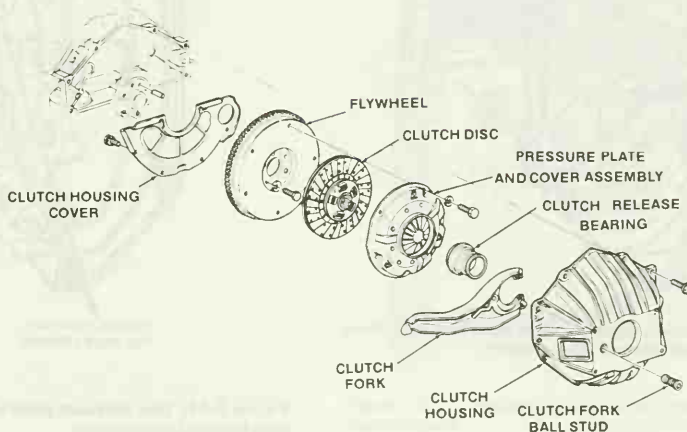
Parts of the clutch and release system. (General Motors Corporation)
